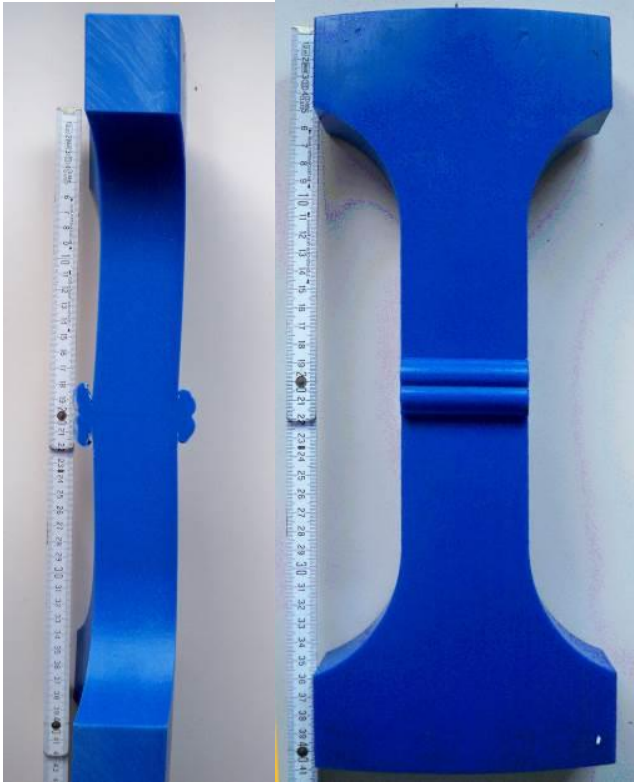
Specimen for tensile creep rupture test on butt fusion welds.
